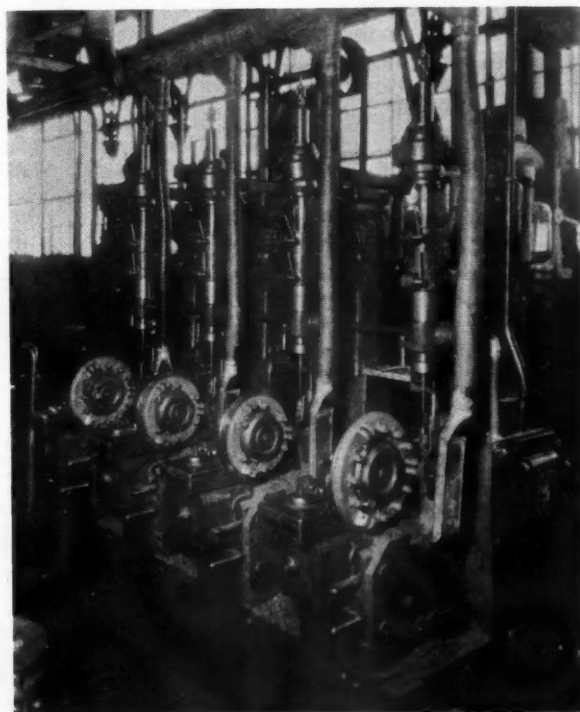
Drilling clevis pin holes in bosses milled as shown in Fig. 8
